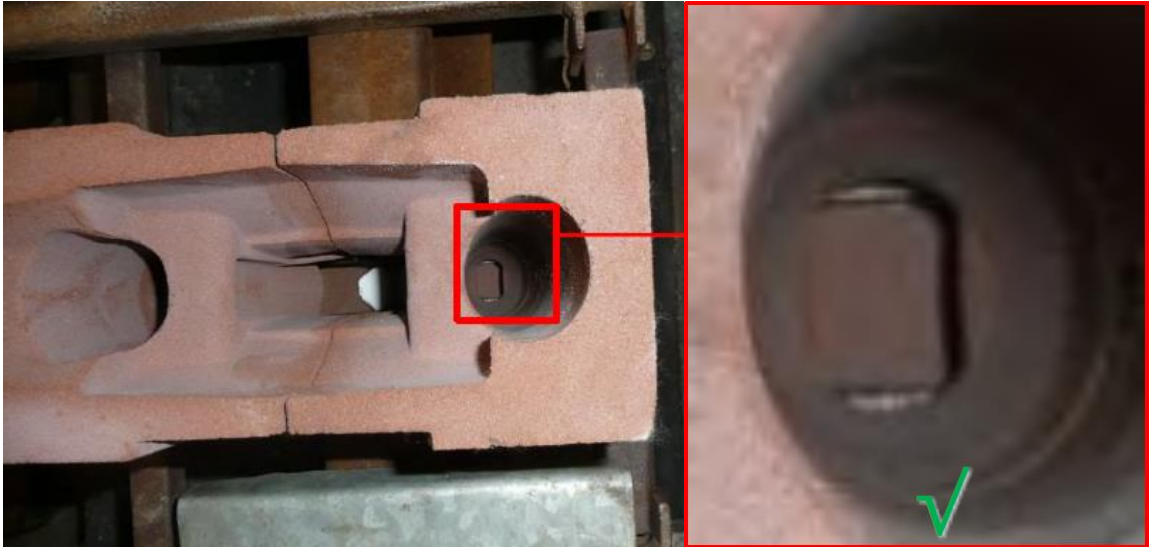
Shine torch through the mould riser to inspect both rail foot sides are uniform
